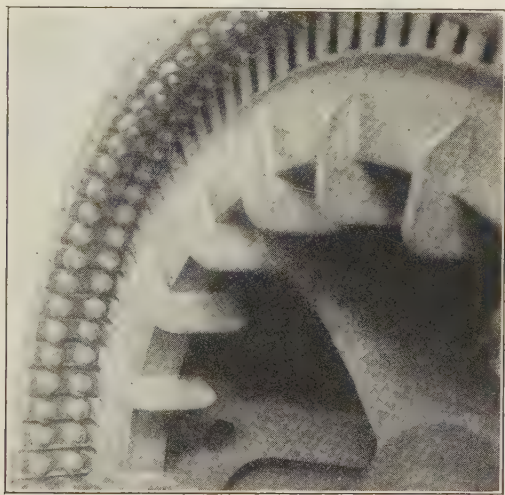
OLD DESIGN OF SQUIRREL-CAGE ROTOR
